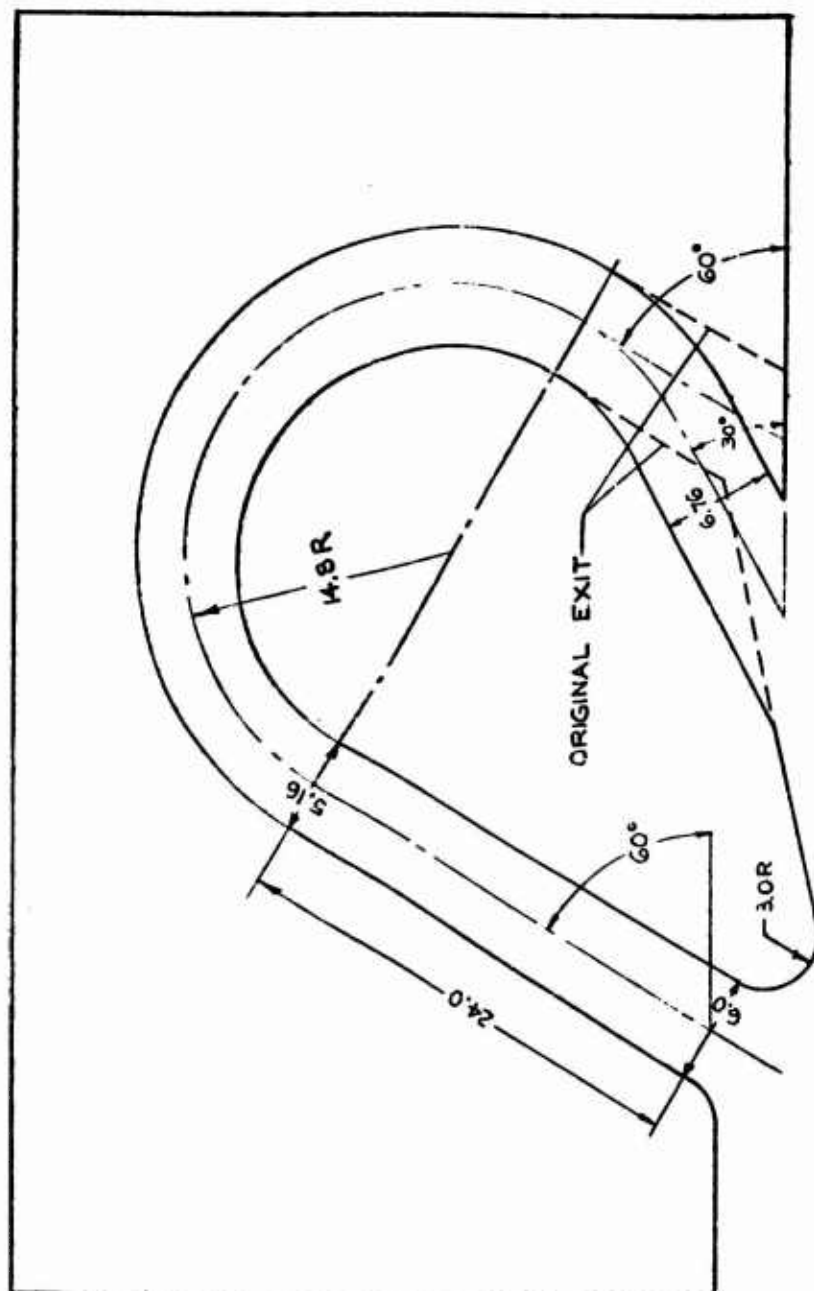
MODEL 4 RECIRCULATING EJECTOR - DIMENSIONAL DRAWING
